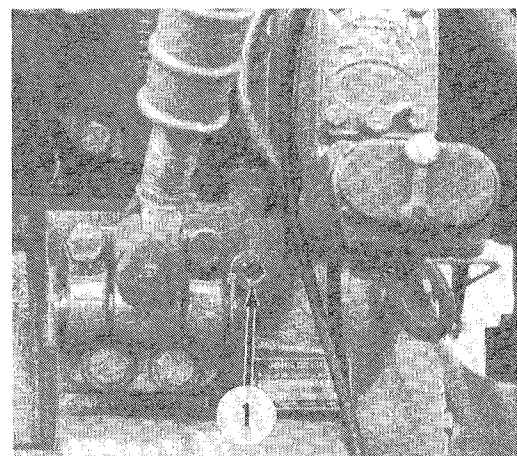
Remove plug (1) from rear of transmission case and use socket extension to adjust load control arm adjusting screw on Models 4050, 4250 and 4450.
